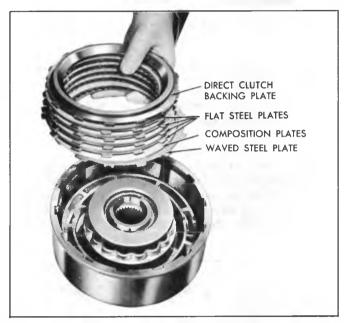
T--Install Direct Clutch Backing Plate, Composition Plates, and Steel Plates
